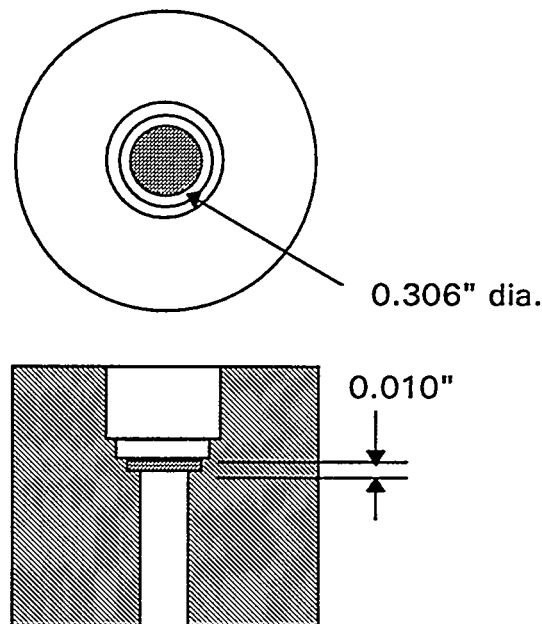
The "Plunger Disk" to "Body B" weld.
